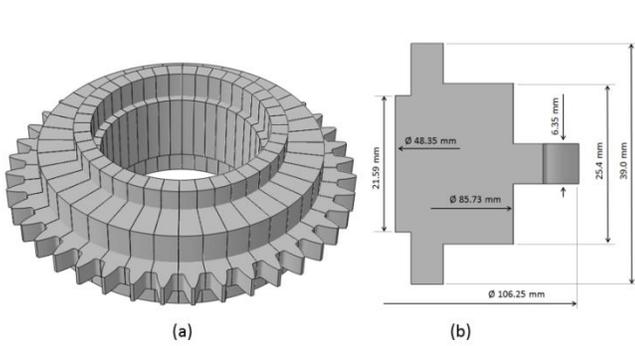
(a) CAD model, and (b) the dimensions of the gear.
